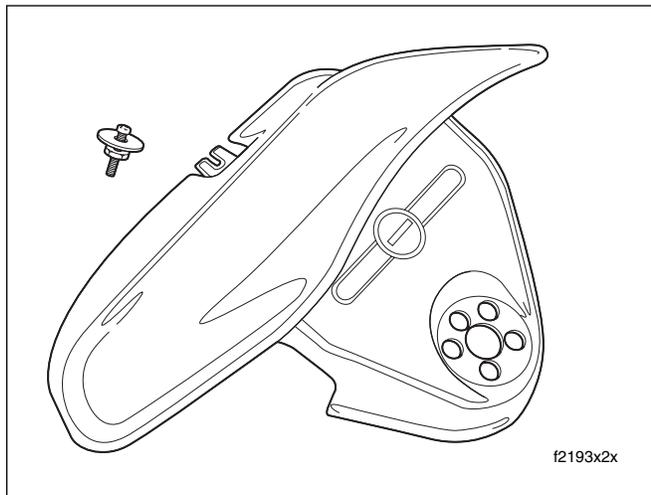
Handlebar Clamp Shroud/Wind Deflector and Screw Assembly
